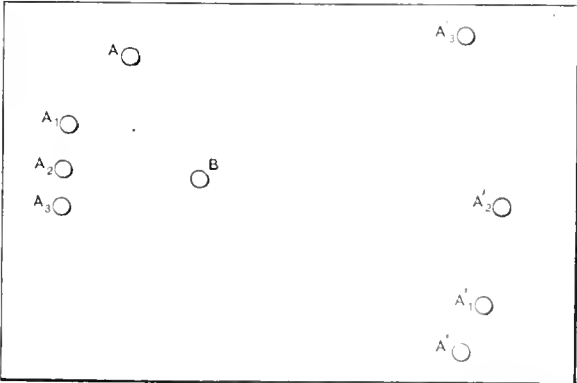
Jig Plate used for Locating Jig in Fig. 1 on Drill Press Table.
